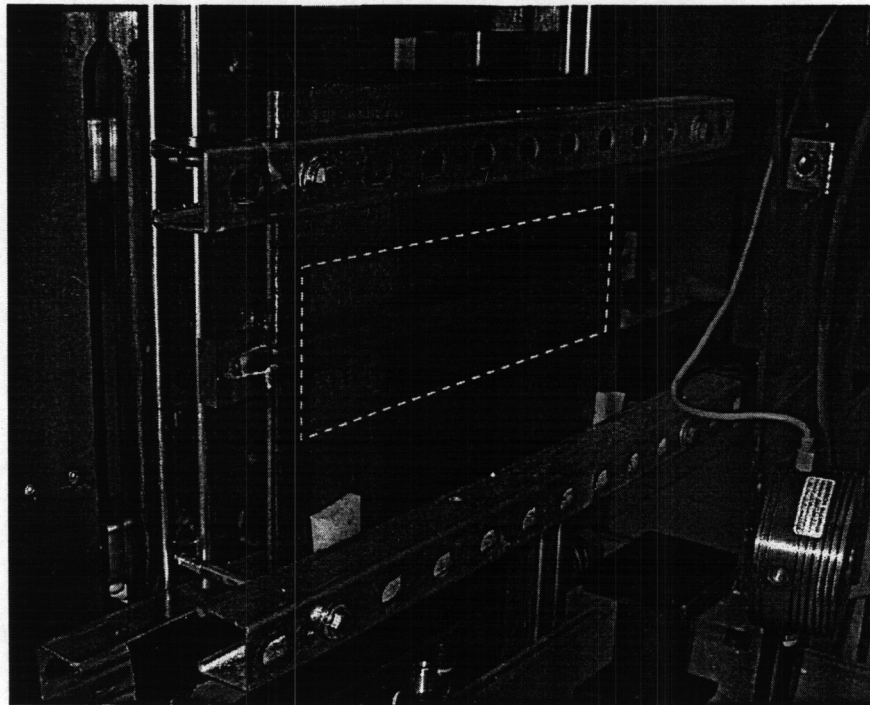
Photograph of the stress mitigation welded coupons; the laser peening is indicated by a dashed rectangle parallel to the weld bead.
